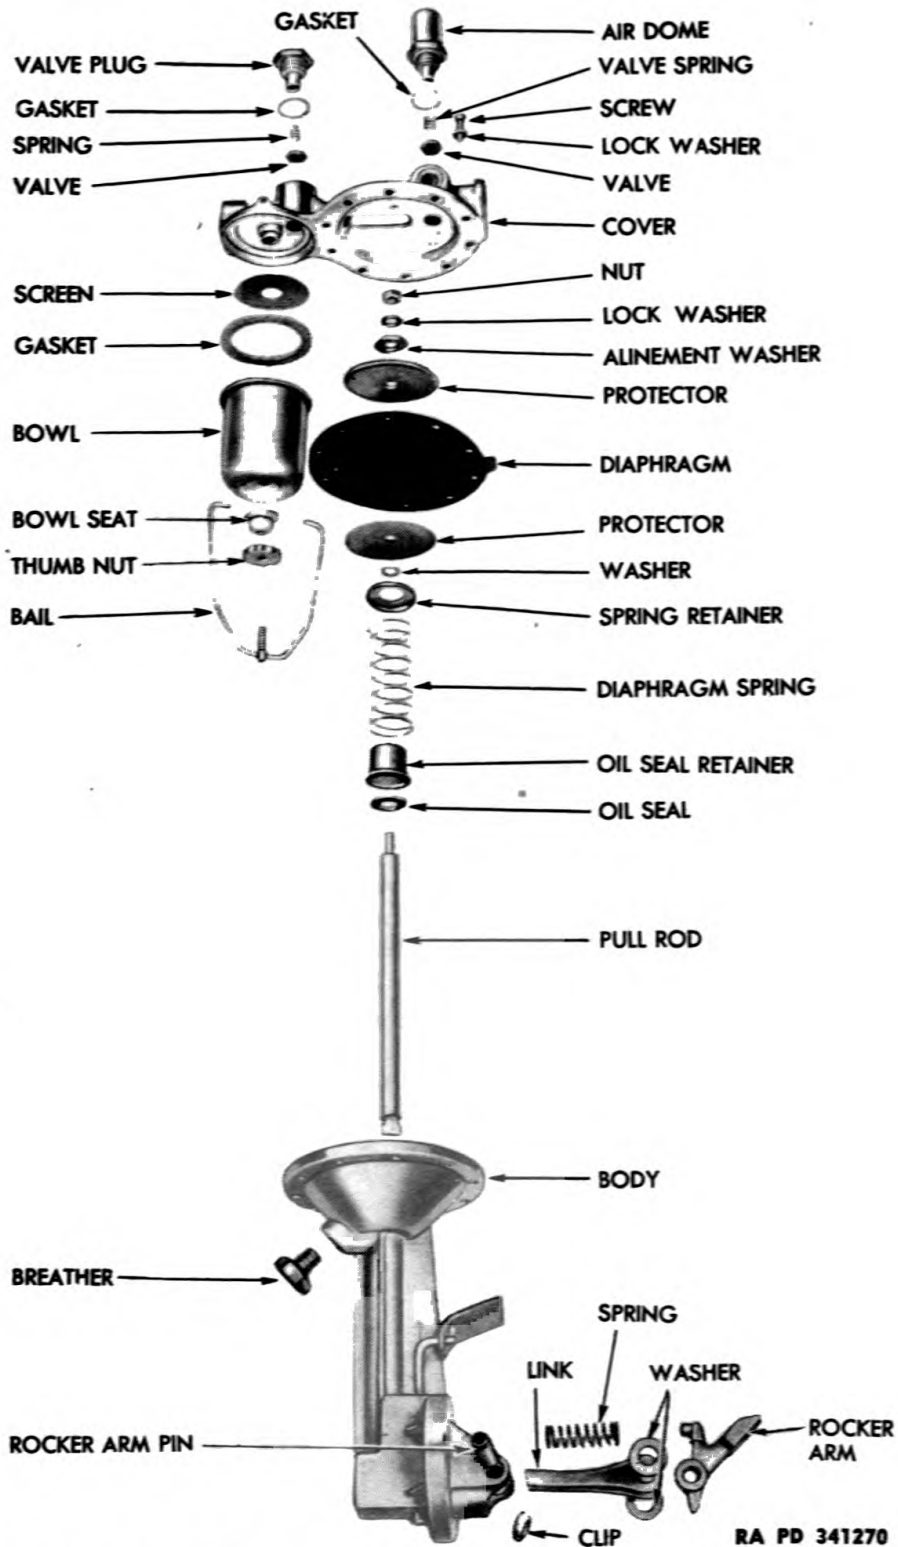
Fuel Pump—Disassembled (Typical Series IHC Special Construction)
